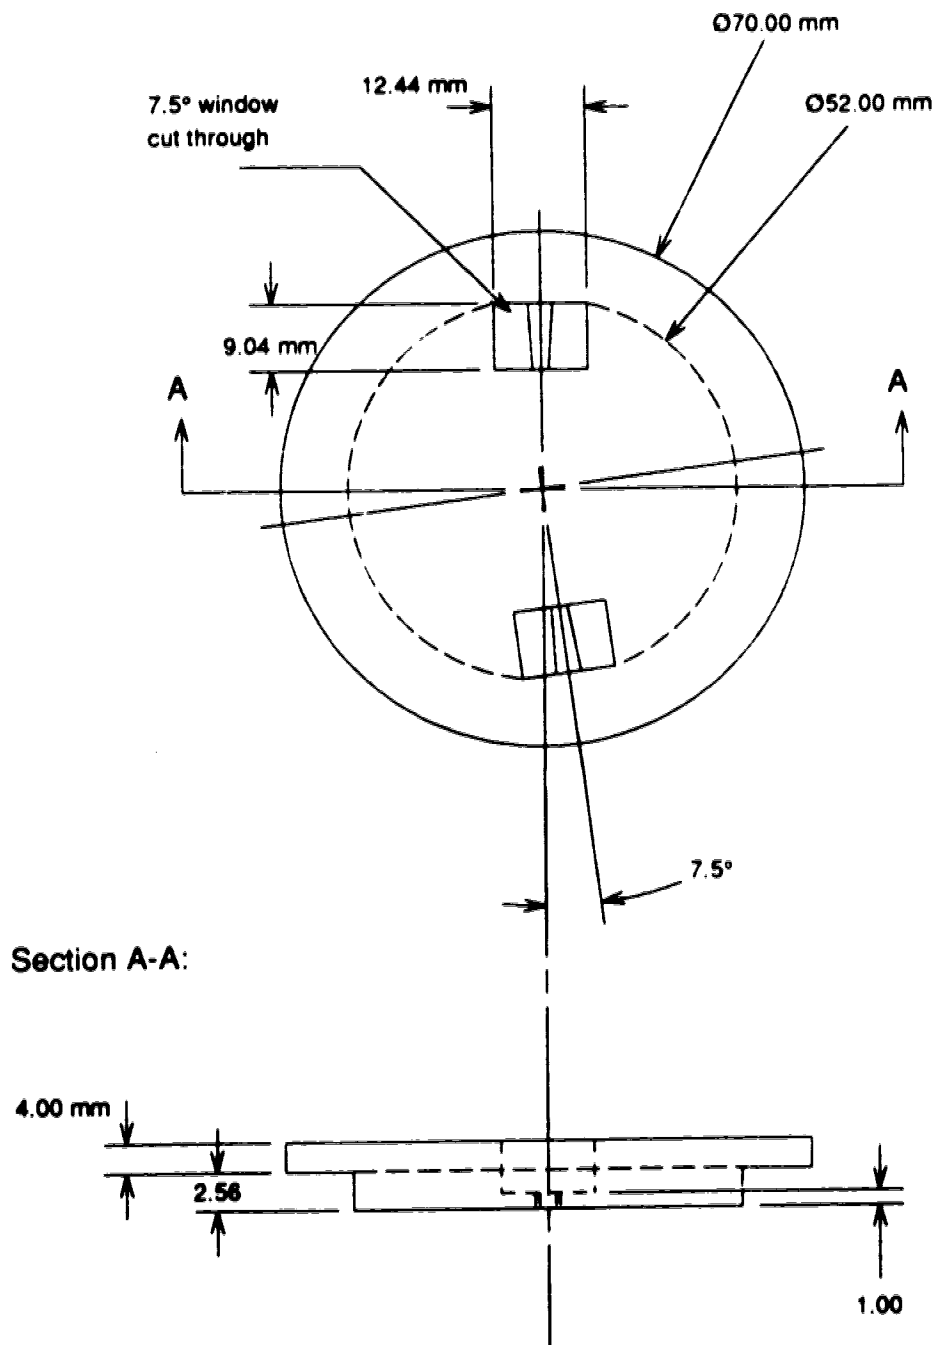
Sensor disc. The sensors are inserted into the rectangular holes.
